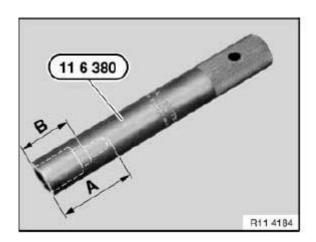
Identifying Special Tool (11 6 380) Dimension
